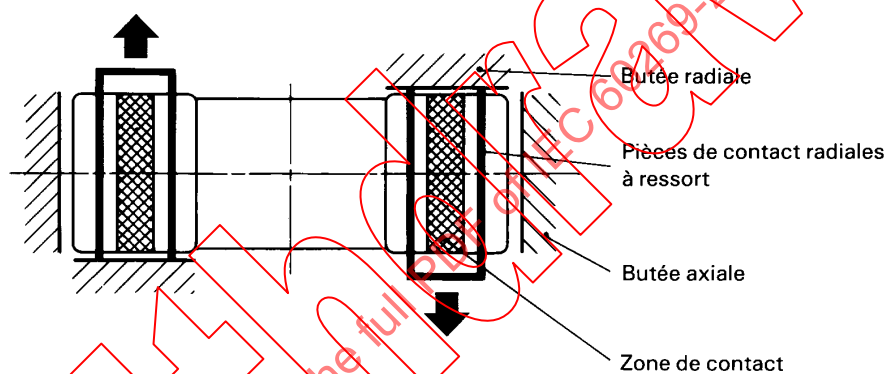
(III) – Fuse-links with cylindrical contact caps with striker
